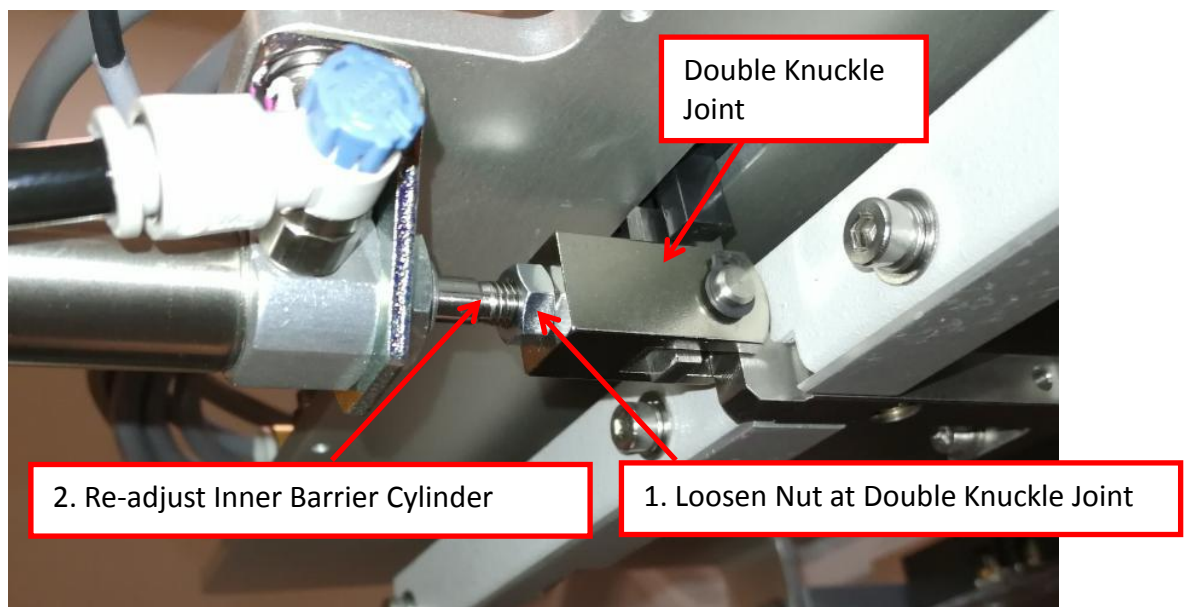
Inner Barrier Cylinder Front End Stroke Adjustment
